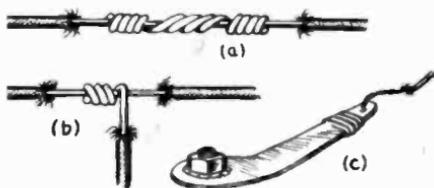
Be sure electrical joints are mechanically strong before applying solder.
